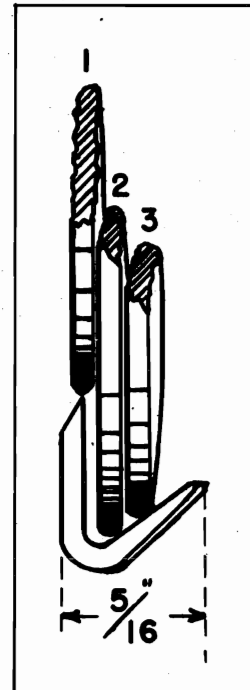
C RECORD SEPARATOR AND RECORDS EDGE VIEW
